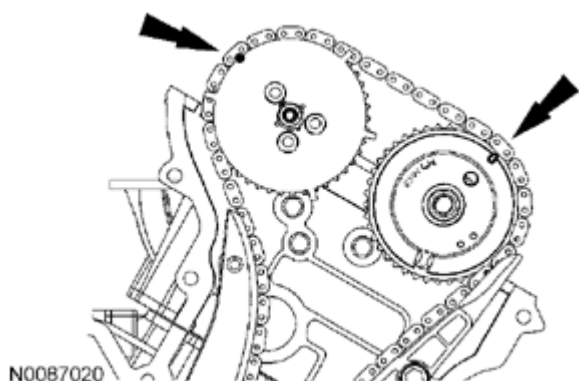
Identifying LH Camshafts Are In Neutral Position
